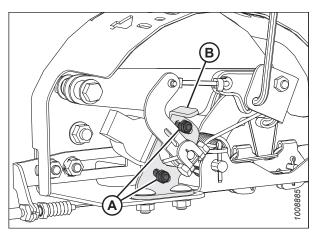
10 Volt AHHC Sensor Assembly for Use with Some New Holland Combines
